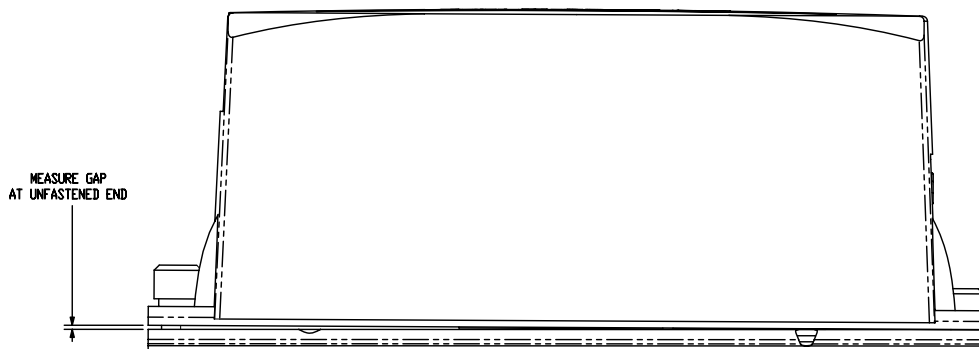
Measuring GRS 77 to Mounting Rack with Feeler Gauge
